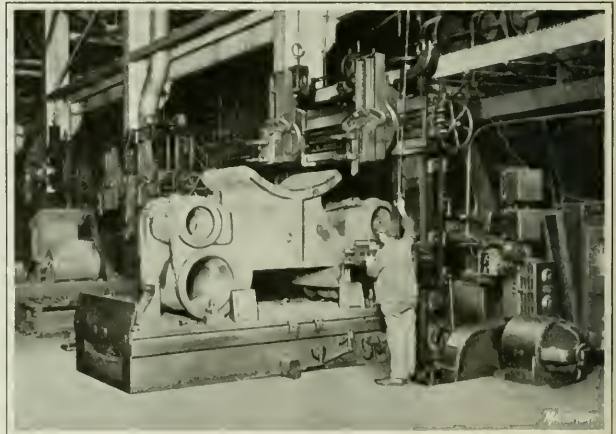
Planer driven by 25-horsepower Adjustable-speed Reversing Planer Motor
